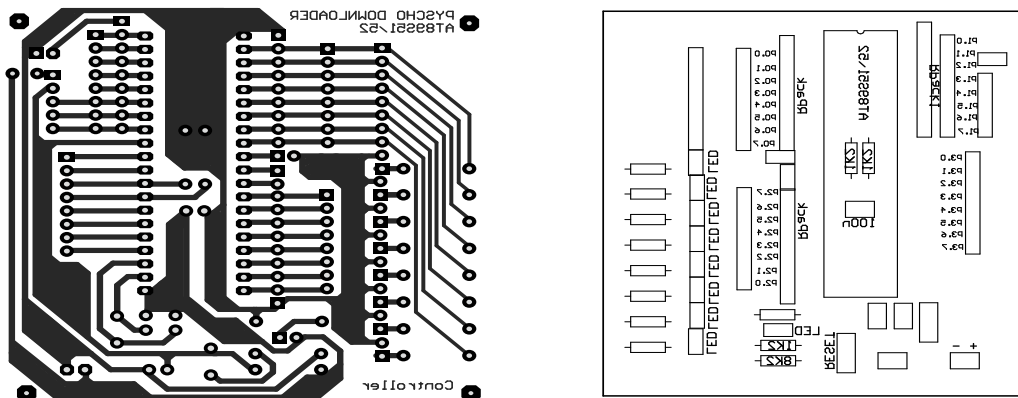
PCB Lay Out and Component Lay Out of Minimum System
